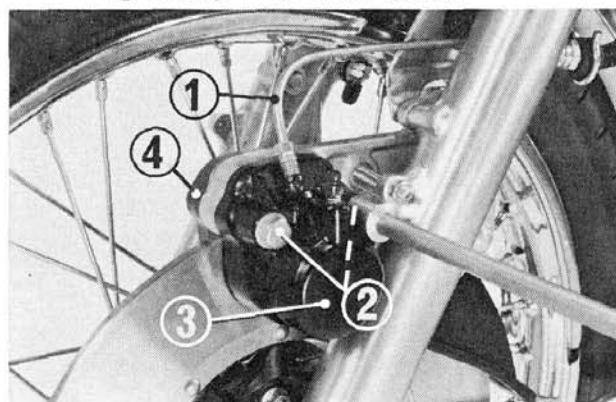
① Oil pipe ② Caliper setting ③ Caliper A
